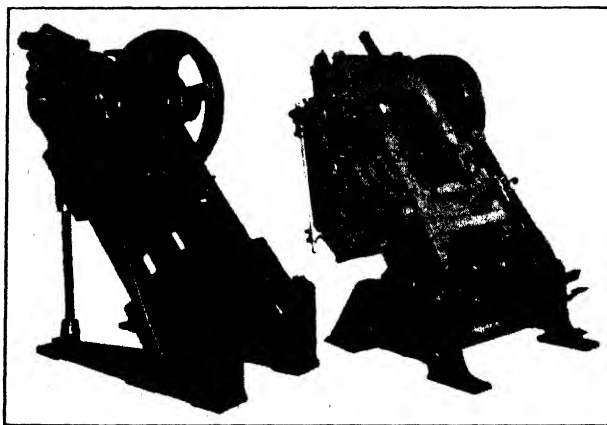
Left: To feed and discharge motor laminations, an eccentric shaft press, inclined 45° in a low mounting, and equipped with cam knockout, releasing brake and die support bolster. At the right, standard "high-production" press, with high-speed feeds, mounted on inclineable legs.
